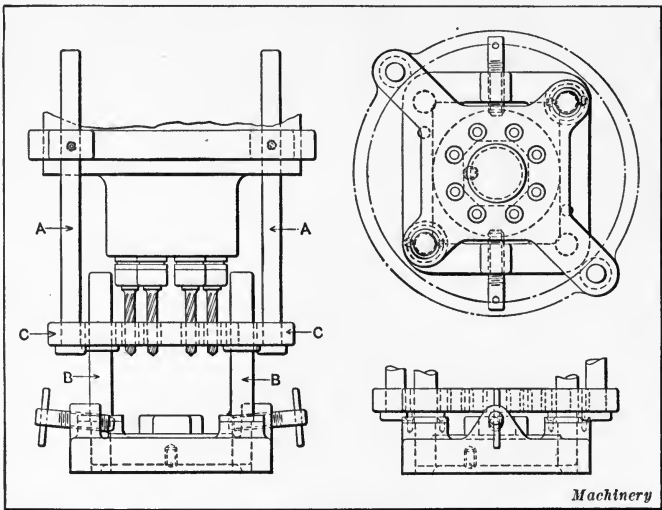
Multiple-spindle Drill Head provided with Jig-plate that is Lifted with Head when Spindle of Drilling Machine Rises in Order to Facilitate Removal of Work from Fixture
